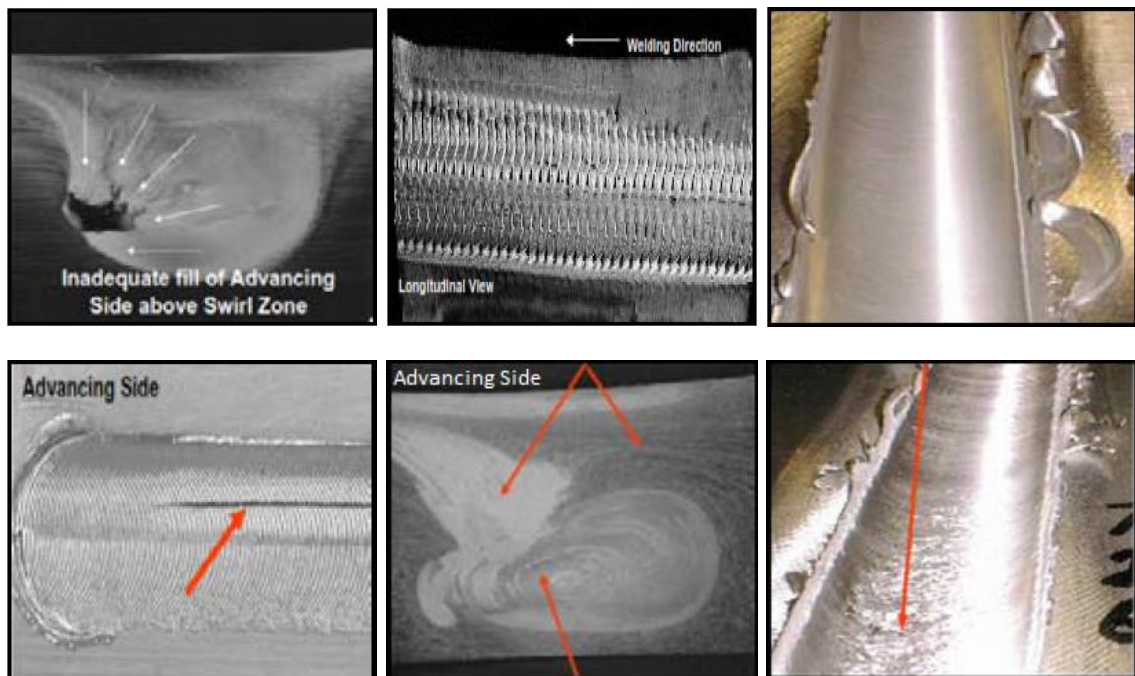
FSW defects, from the left to the right, top then bottom row: worm hole, scalloping, ribbon flash, surface lack of fill, nugget collapse, and surface galling [18].
